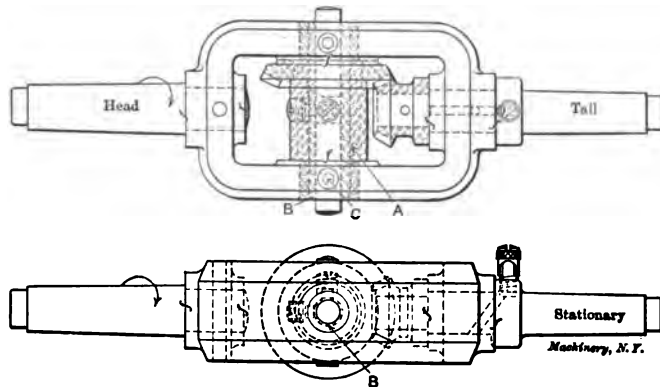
Fixture for Grinding Spherical End Measure Rods.
